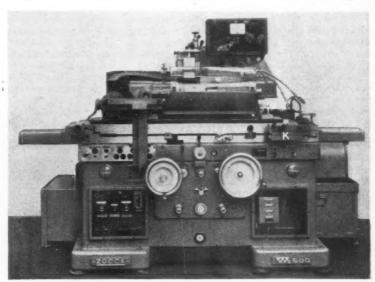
Zocca type R.P.S. hydraulic grinder of patented design, for pistons up to 7 in. diameter
